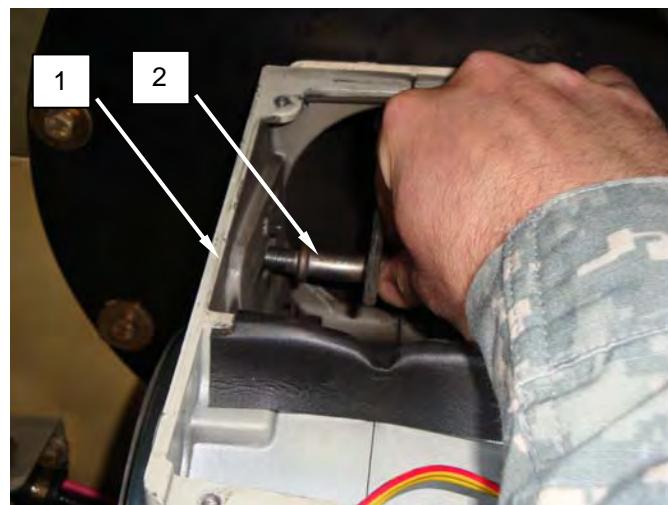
Removing Fuel Line Tube from Housing Assembly.
